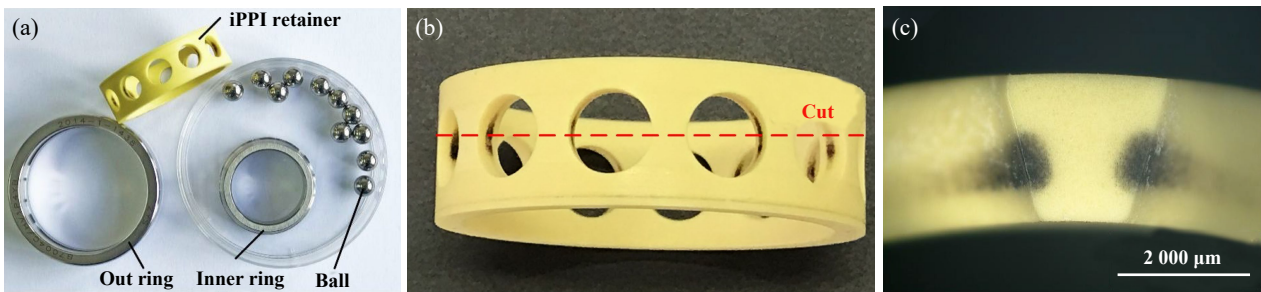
Bearing and worn surfaces of porous polyimide retainer: (a) disassembled bearing; (b) iPPI retainer; (c) blackening of cross section of retainer
